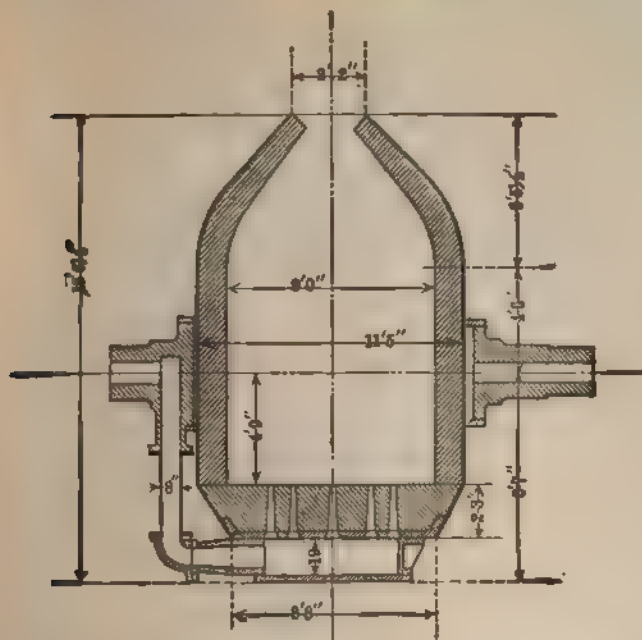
FIG. VI-A.—BESSEMER CONVERTER IN UPRIGHT POSITION.
